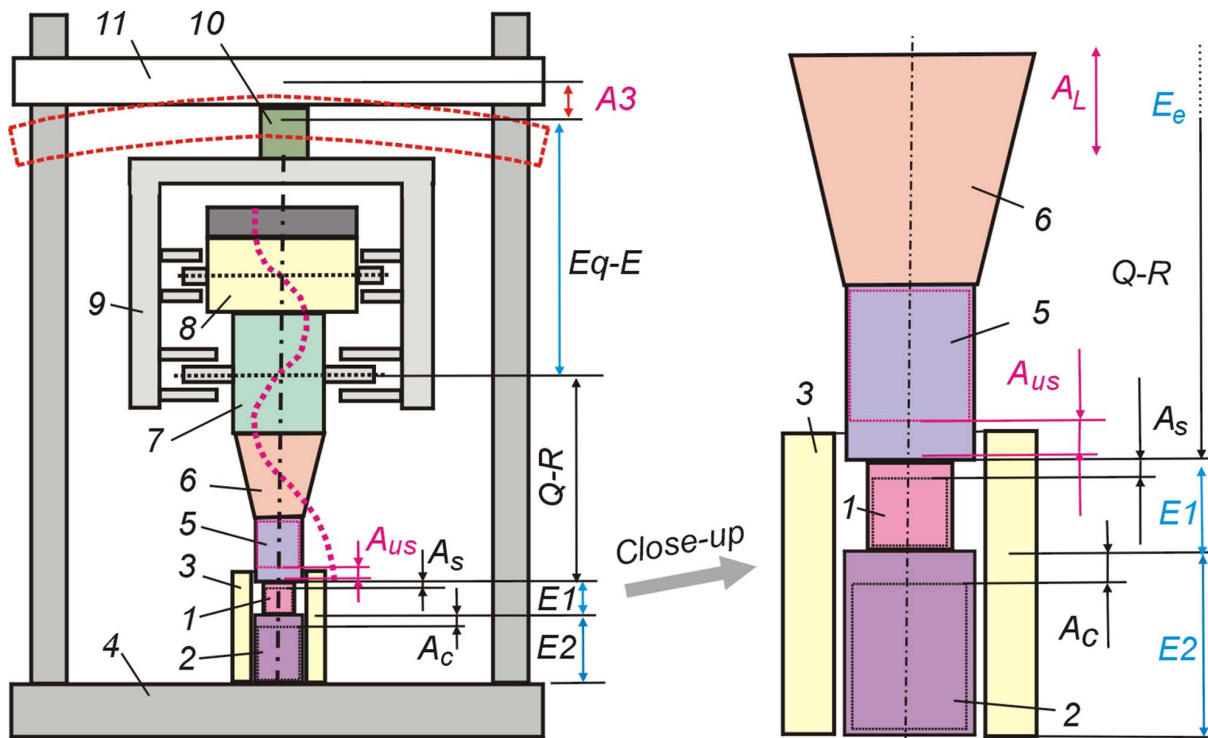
Scheme of the experimental setup: sample – 1, lower punch – 2, micro-tool set – 3, table of the testing machine – 4, upper punch – 5, sonotrode – 6, booster – 7, sandwich transducer – 8, frame – 9, force transducer – 10, ram of the testing machine – 11. A description of the process parameters shown can be found in the text
